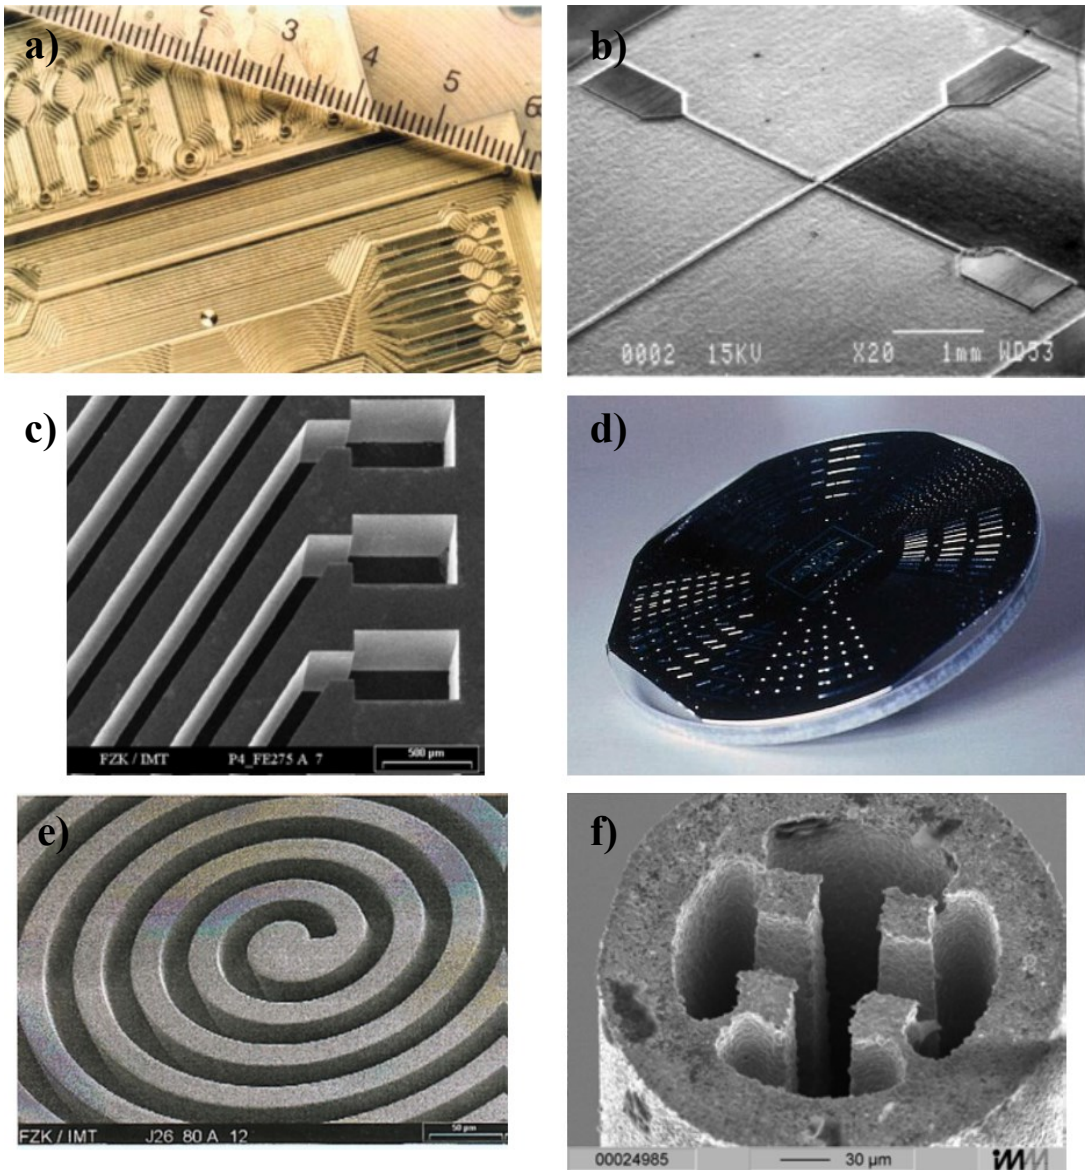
Mold inserts fabricated by different processes: (a) milling with a CNC machine, (b) laser-manufactured tool with different surface roughness, (c) x-ray lithography and electroplating,(LIGA) (d) silicon etching (courtesy of Jenoptik Mikrotechnik GmbH), (e) photolithography with SU8, and (f) electric discharge machining (courtesy of Institut für Mikrotechnik Mainz) [125] [© IOP Publishing. Reproduced with permission. All rights reserved].
